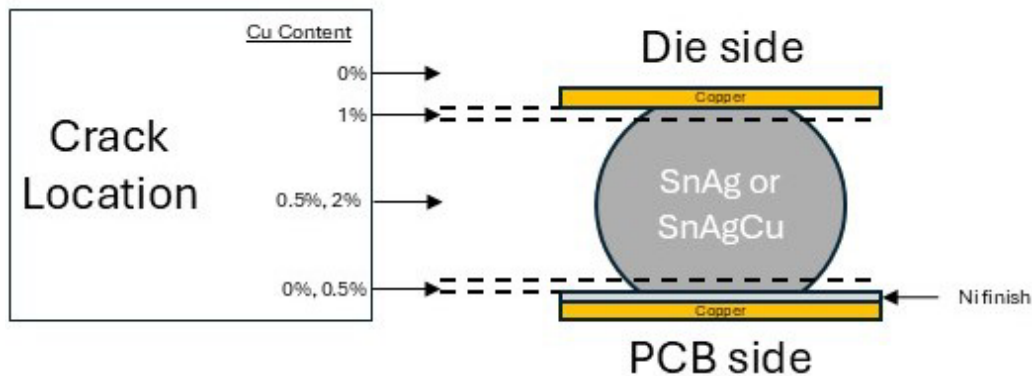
Flip chip solder joint crack location relative to Cu content in solder. Adapted from [12].
